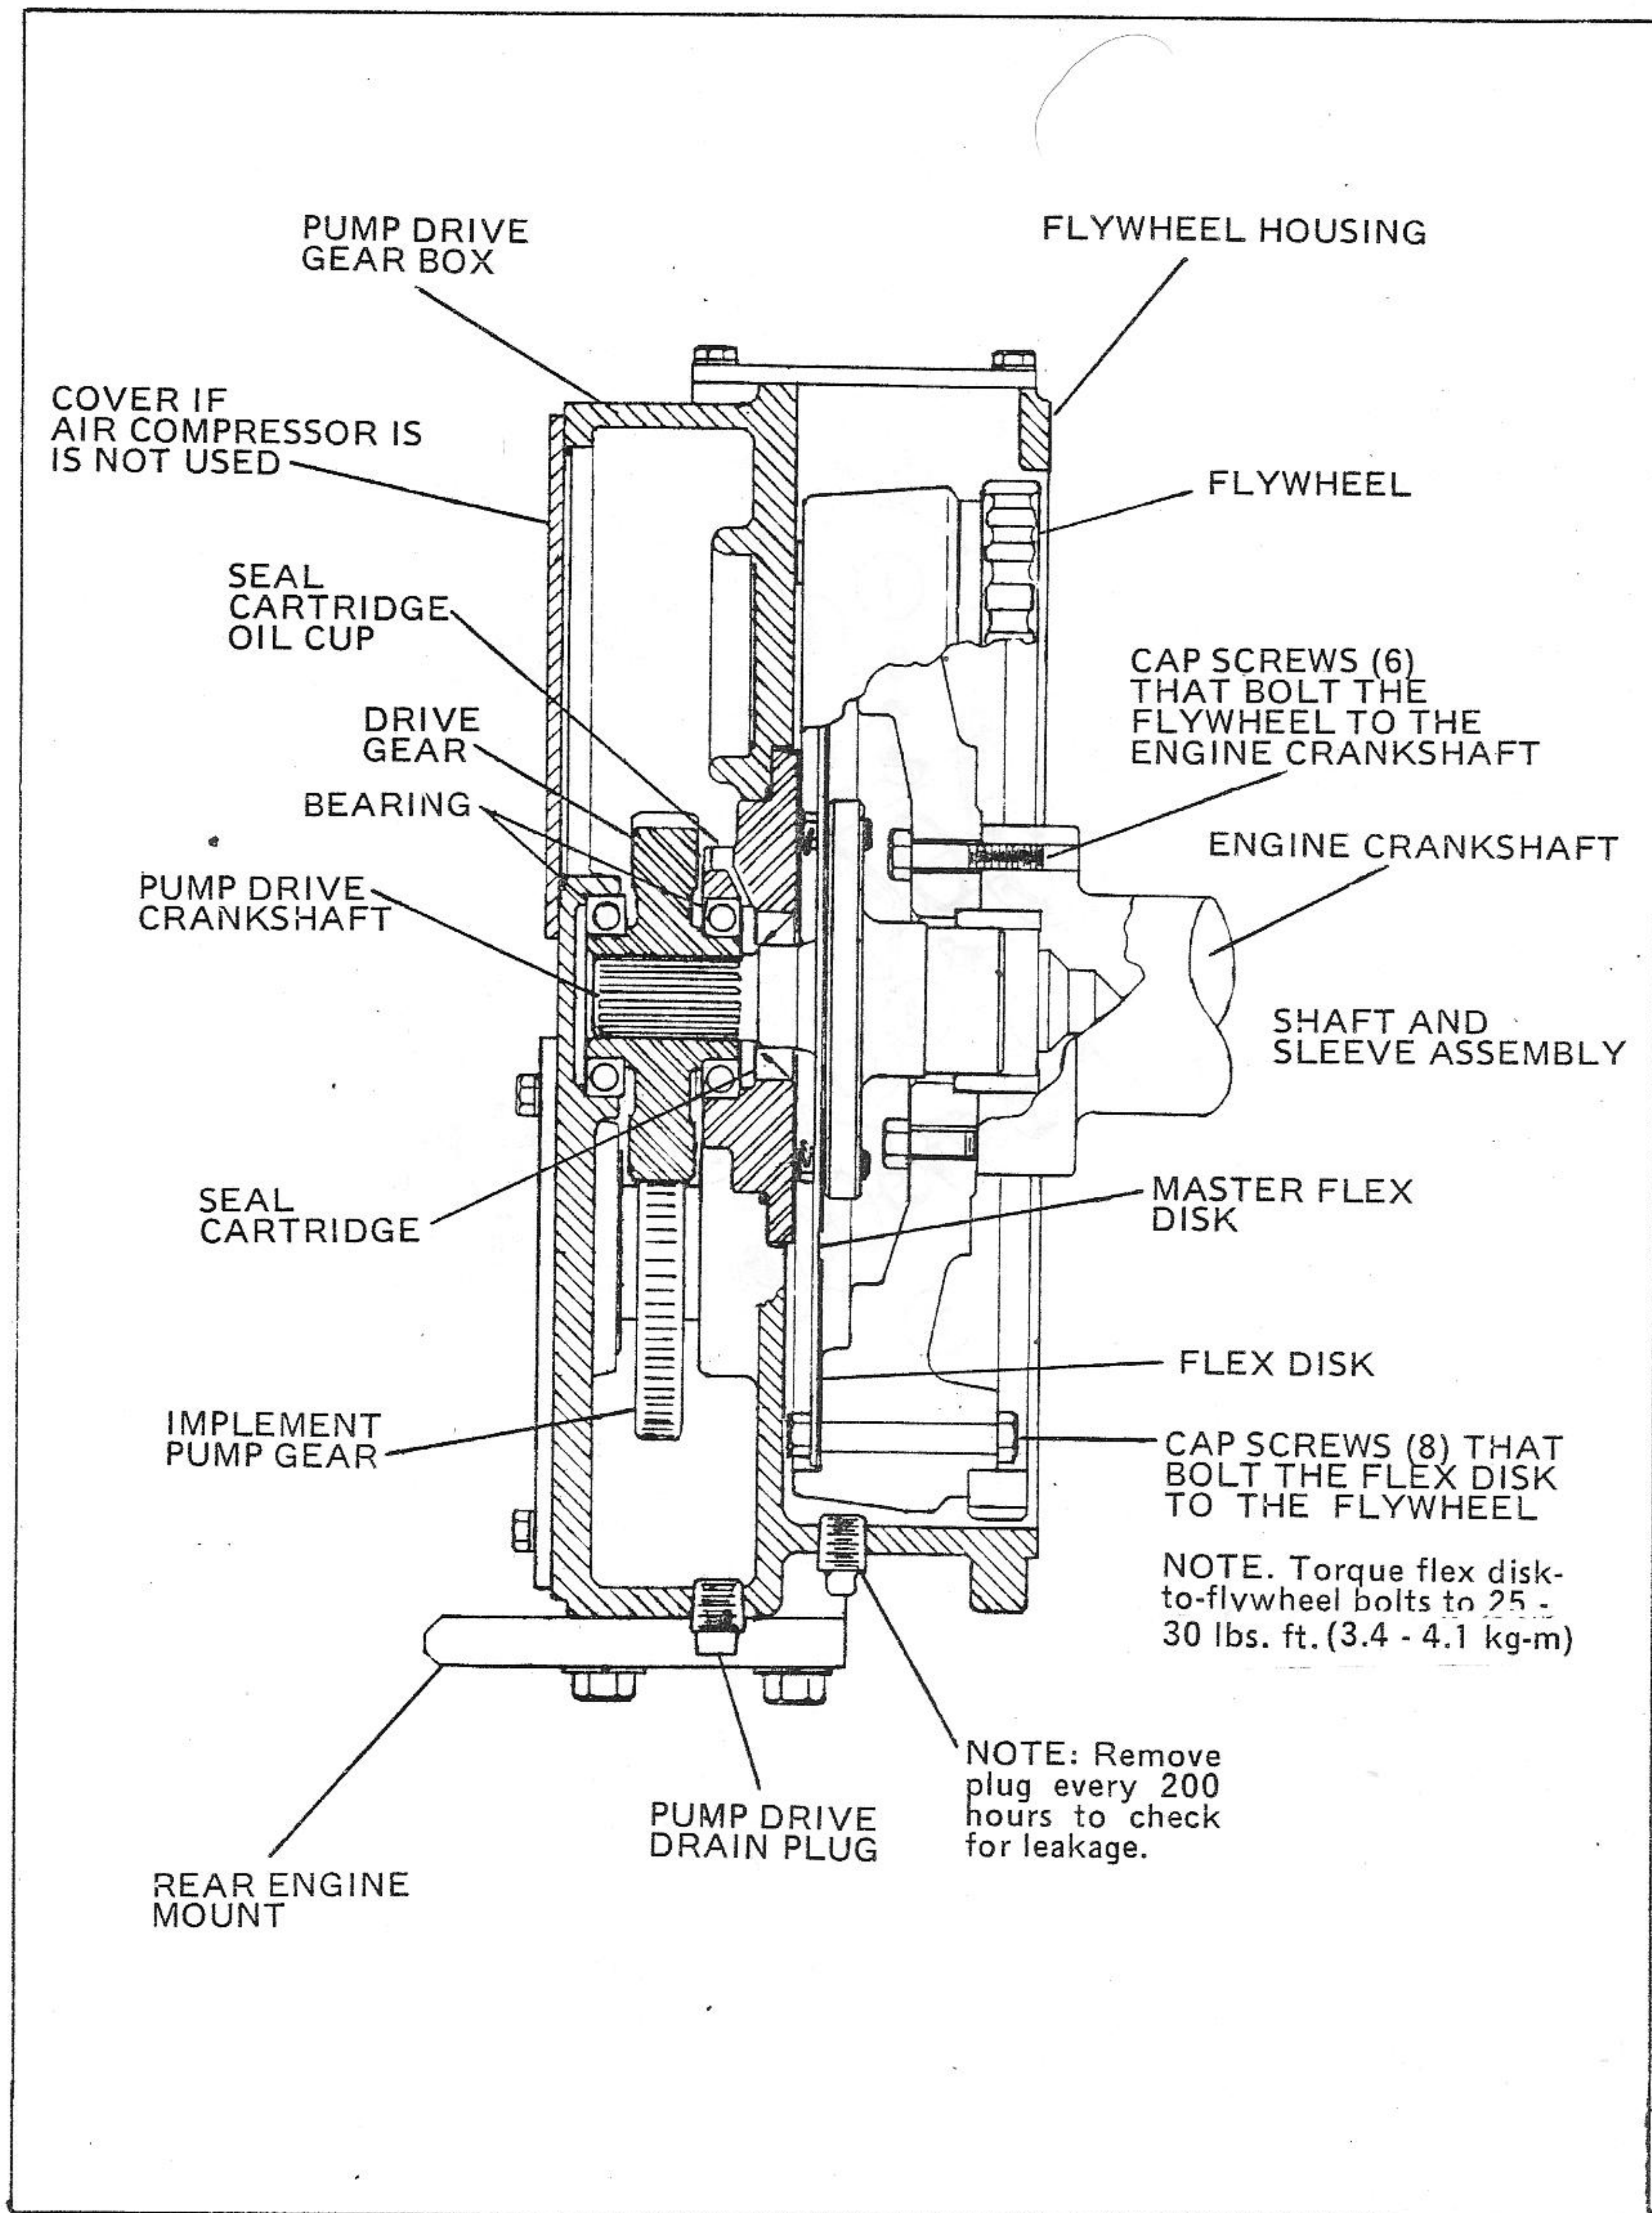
4. PUMP DRIVE INSTALLATION
